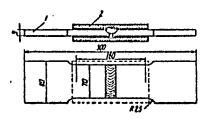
Welded joint with an enlarged sectional view. 1--sample; 2--heat insulation
